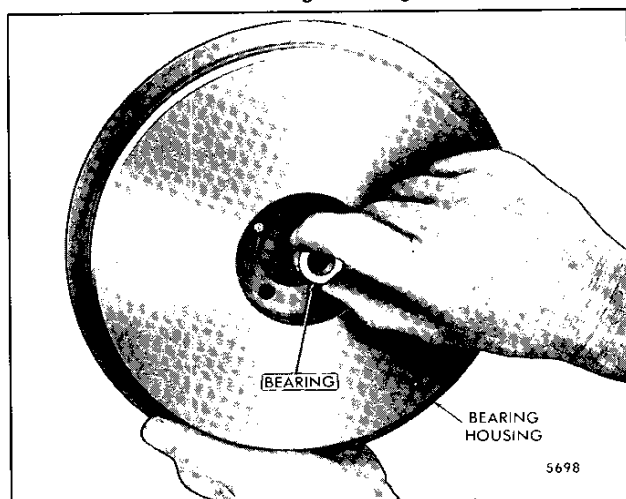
Removing Turbine Shaft Bearing from Bearing Housing
